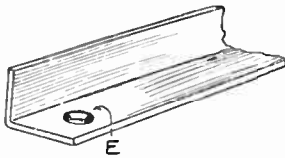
B.—SHOWING COUNTERSUNK HOLE FOR WOOD SCREW.
